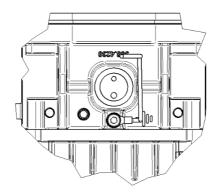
grounding wiring for fixture equipped with two-pole cable lead with plug
